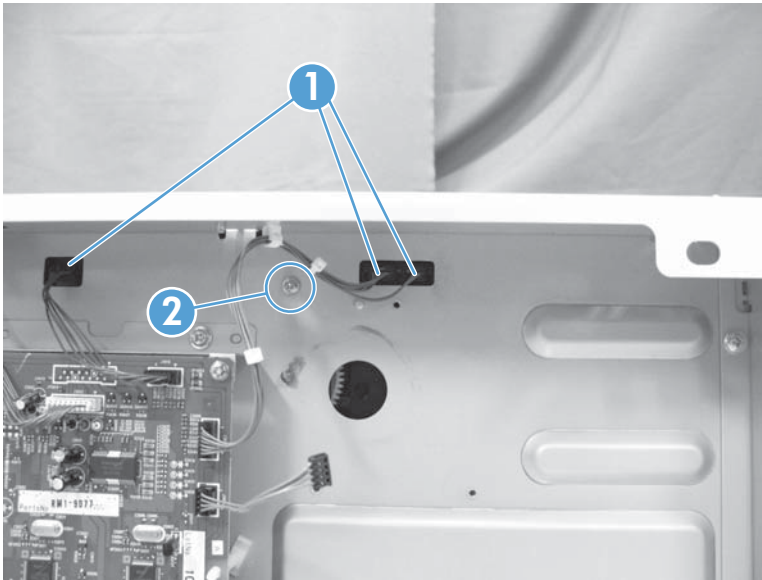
Remove the HCI right tray automatic close assembly (2 of 2)
